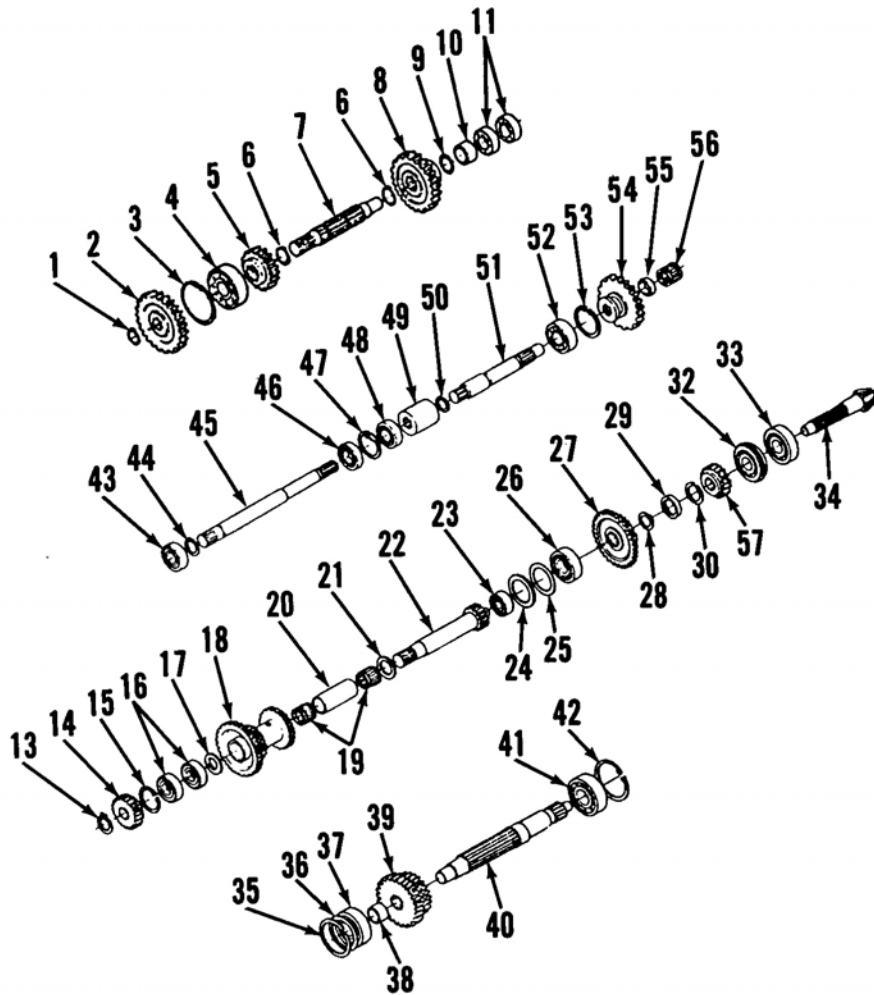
Exploded view of transmission gears and shafts used on Models B6100HST-D and B7100HST-D. Refer to legend in Fig. 71 for identification of parts except for the following.
